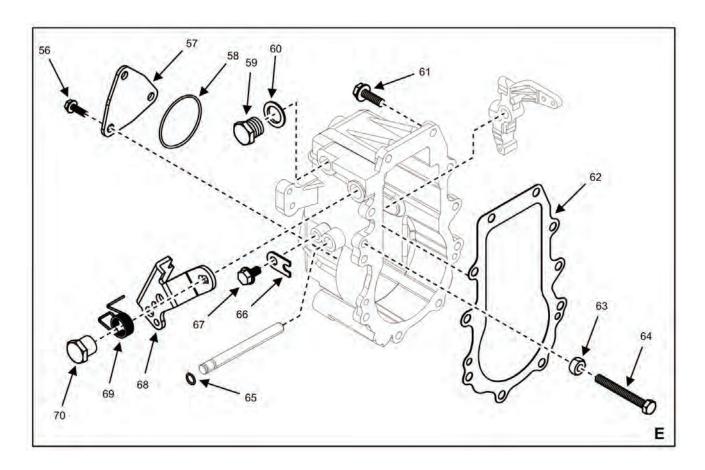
Fuel Injection Pump (Sheet 4 of 4).
